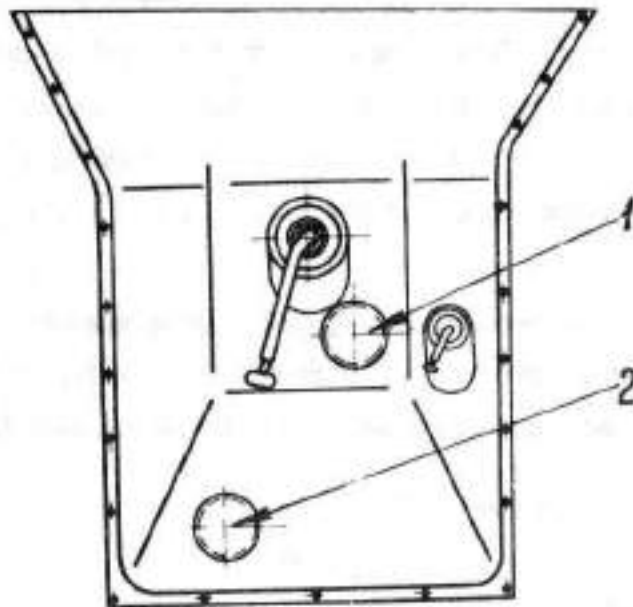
LOCATION OF GEARBOX TRANSFERBOX FILLER PLUGS.
